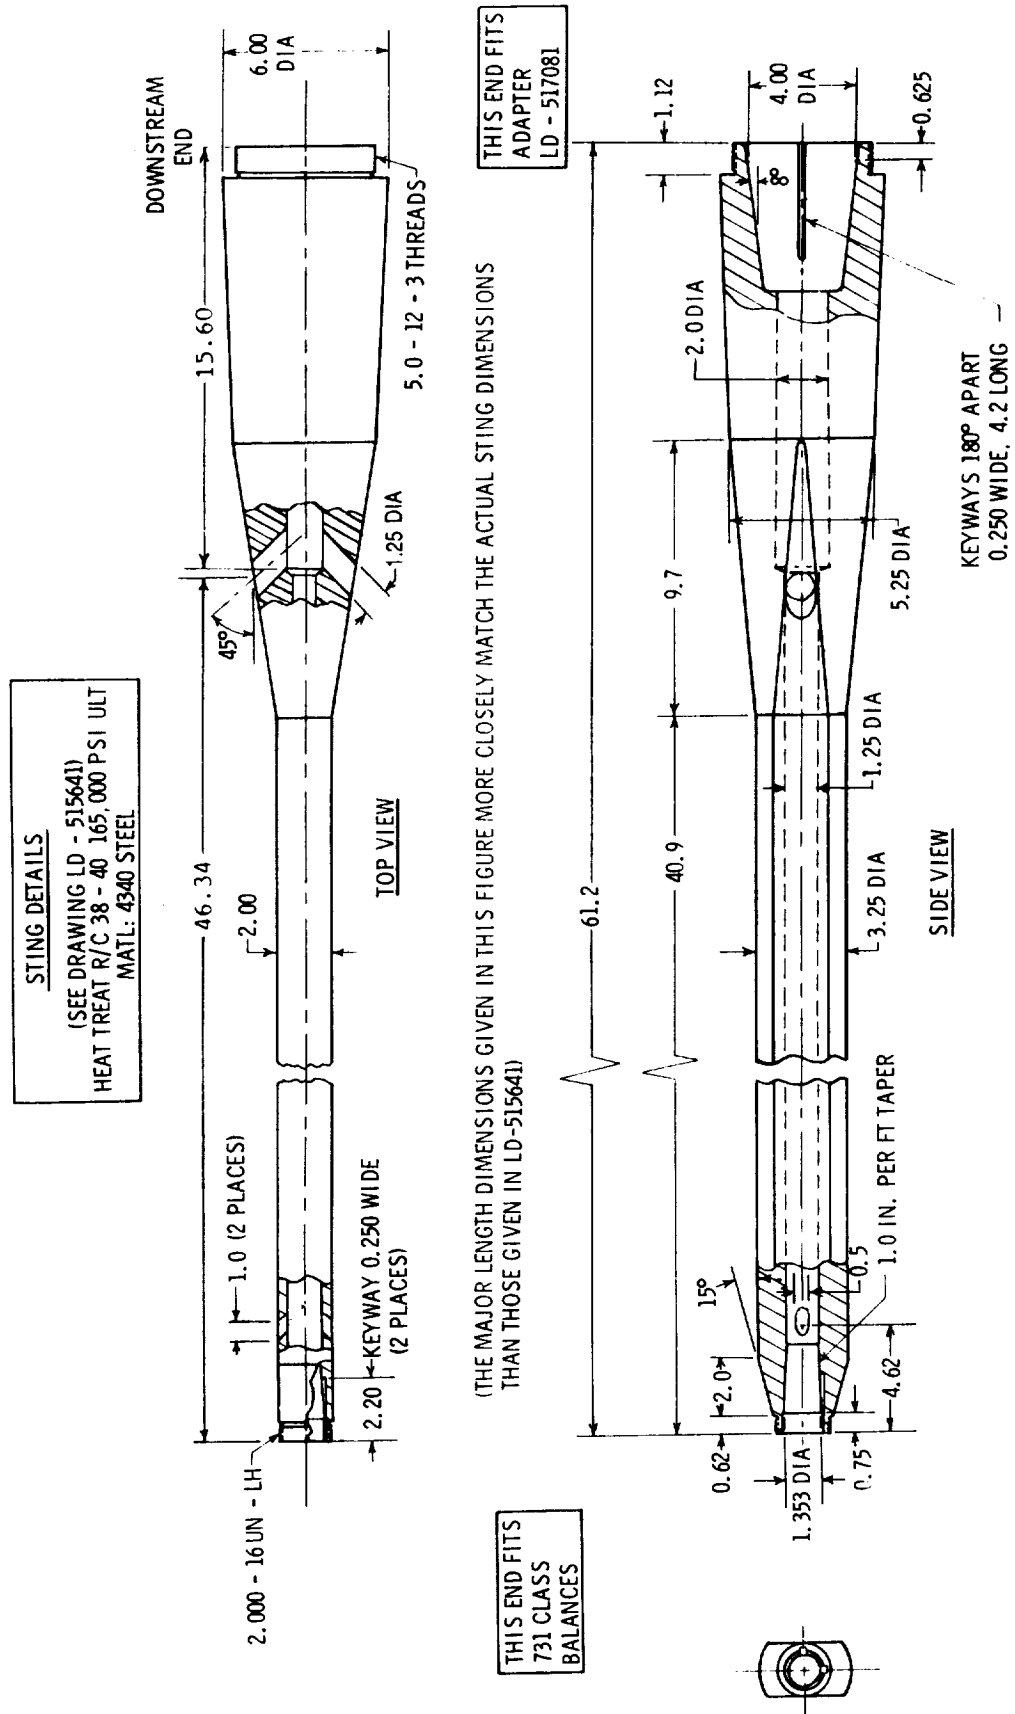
Sketch of sting LD-515641A. (All dimensions are in inches unless otherwise indicated.)
